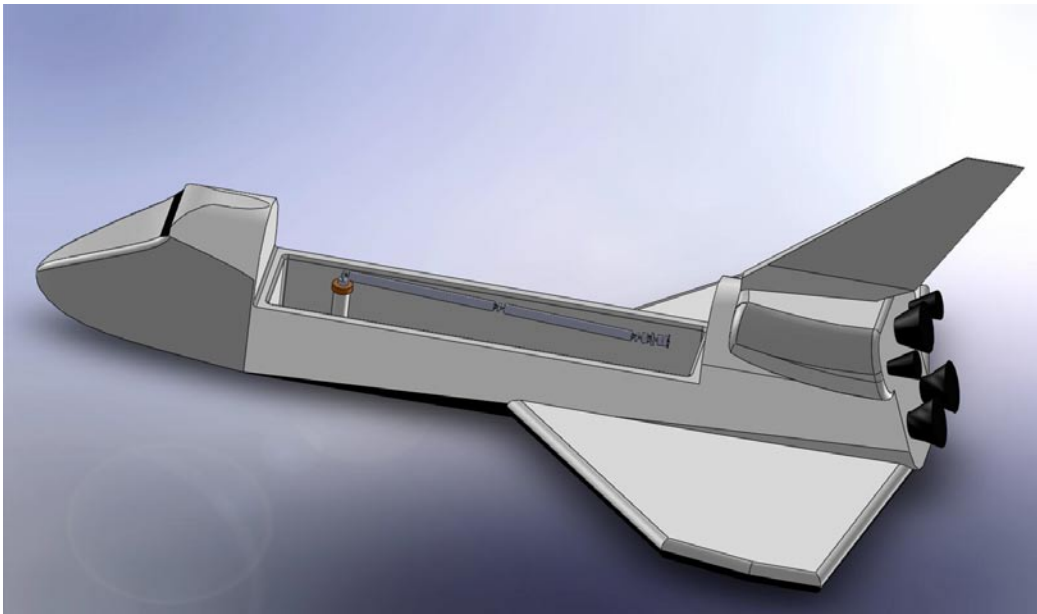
SolidWorks Design of Completed Shuttle Arm.
